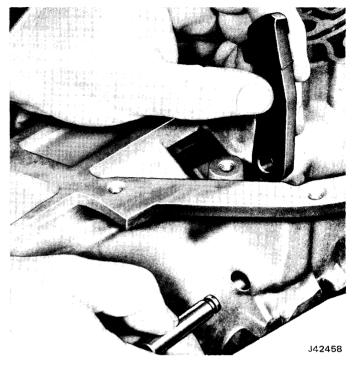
Removing Parking Pawl and Pawl Shaft
